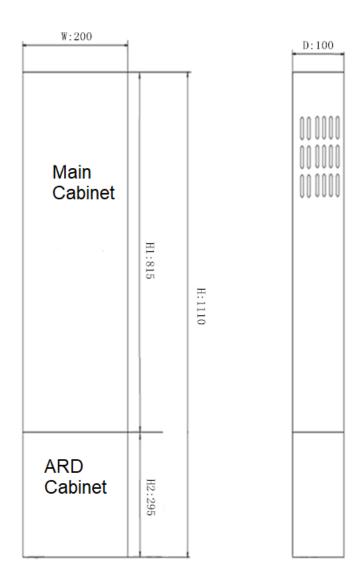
APPEARANCE AND EXTERNAL DIMENSION OF INTEGRATED CABINET (UNIT:MM)
